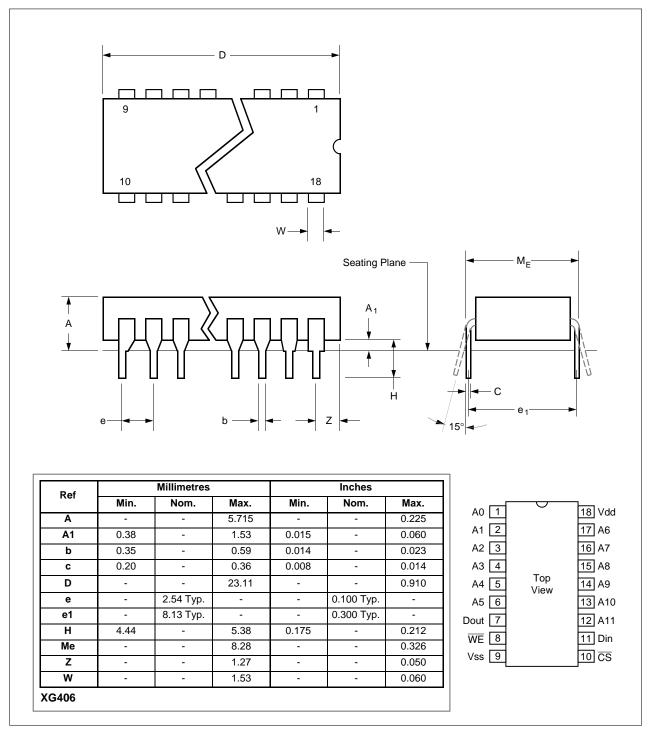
18-Lead Ceramic DIL (Solder Seal) - Package Style C
